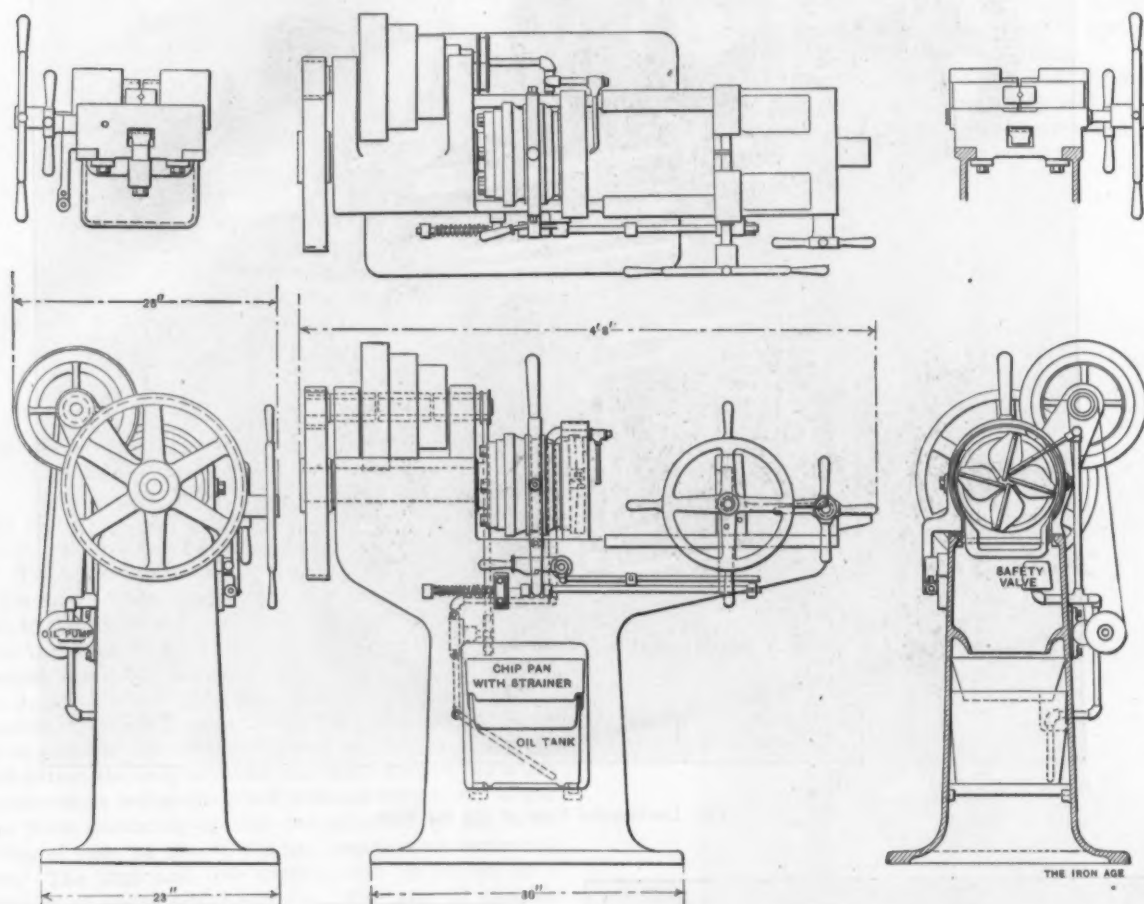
Plan, Rear, Side and Front Elevations and Sections of the Machine.
